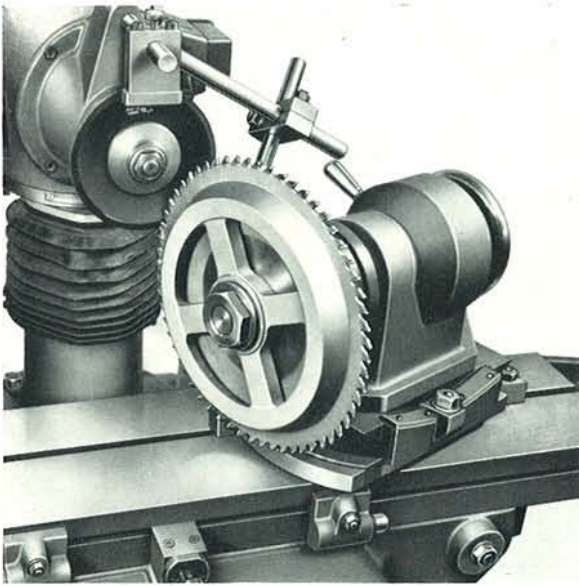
Equipment can be supplied for grinding Oertli hogging heads and saws. Illustration shows grinding of top bevel on saw blades using special indexing arm and supporting flanges on stub arbor.
